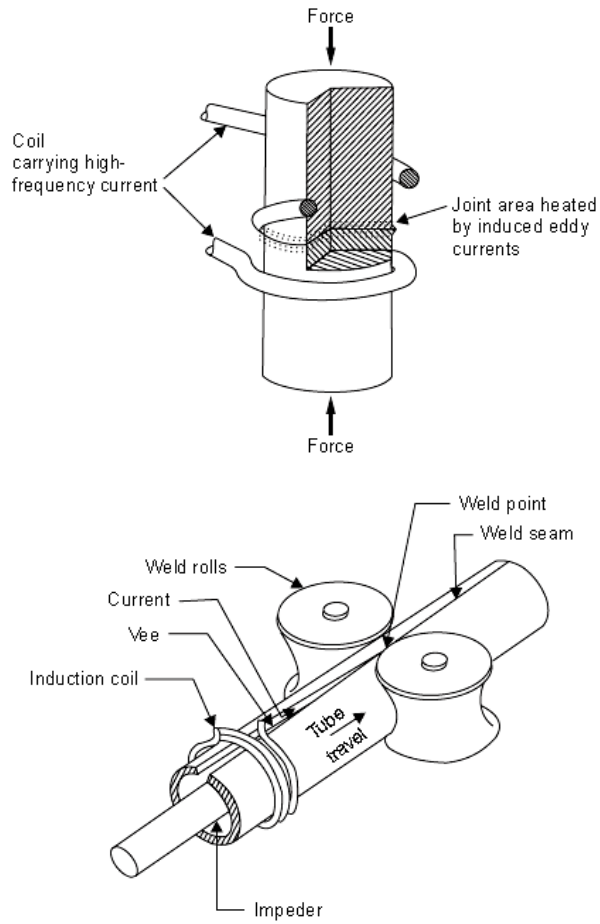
Sketch of high-frequency pressure welding
